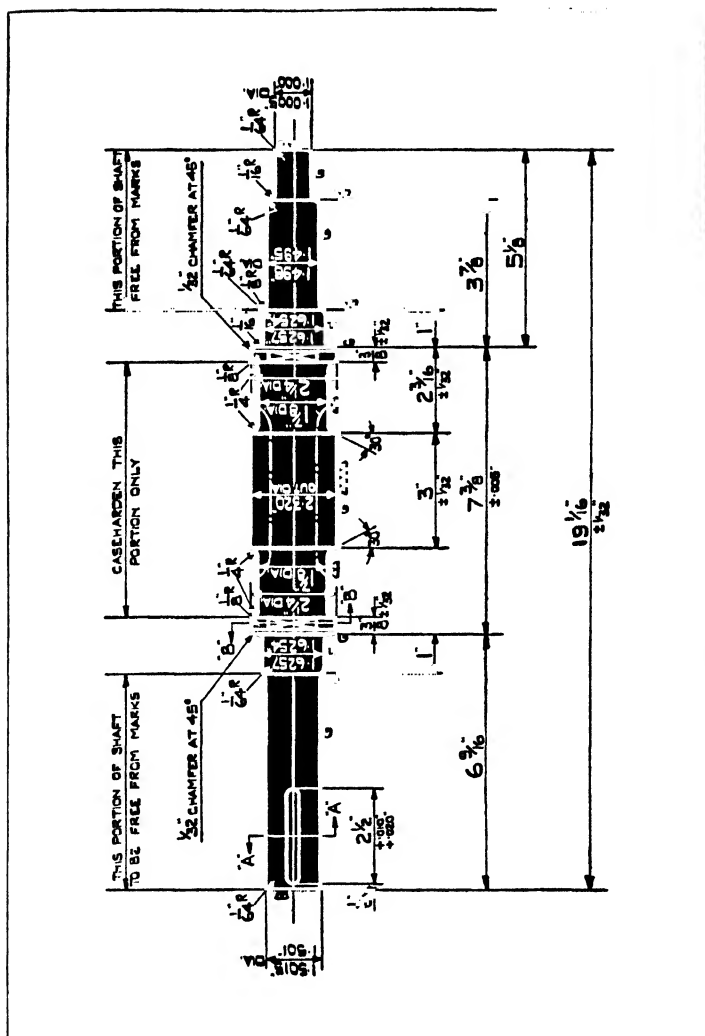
shows a drawing typical of those used in many engineering works, and Fig. 10 shows the same part drawn in a more readable fashion; the difference between the use of chain dimensioning and dimensioning from a datum line are well illustrated, as are differences in figure placement, statement of tolerances, and part and dimension line thicknesses.
